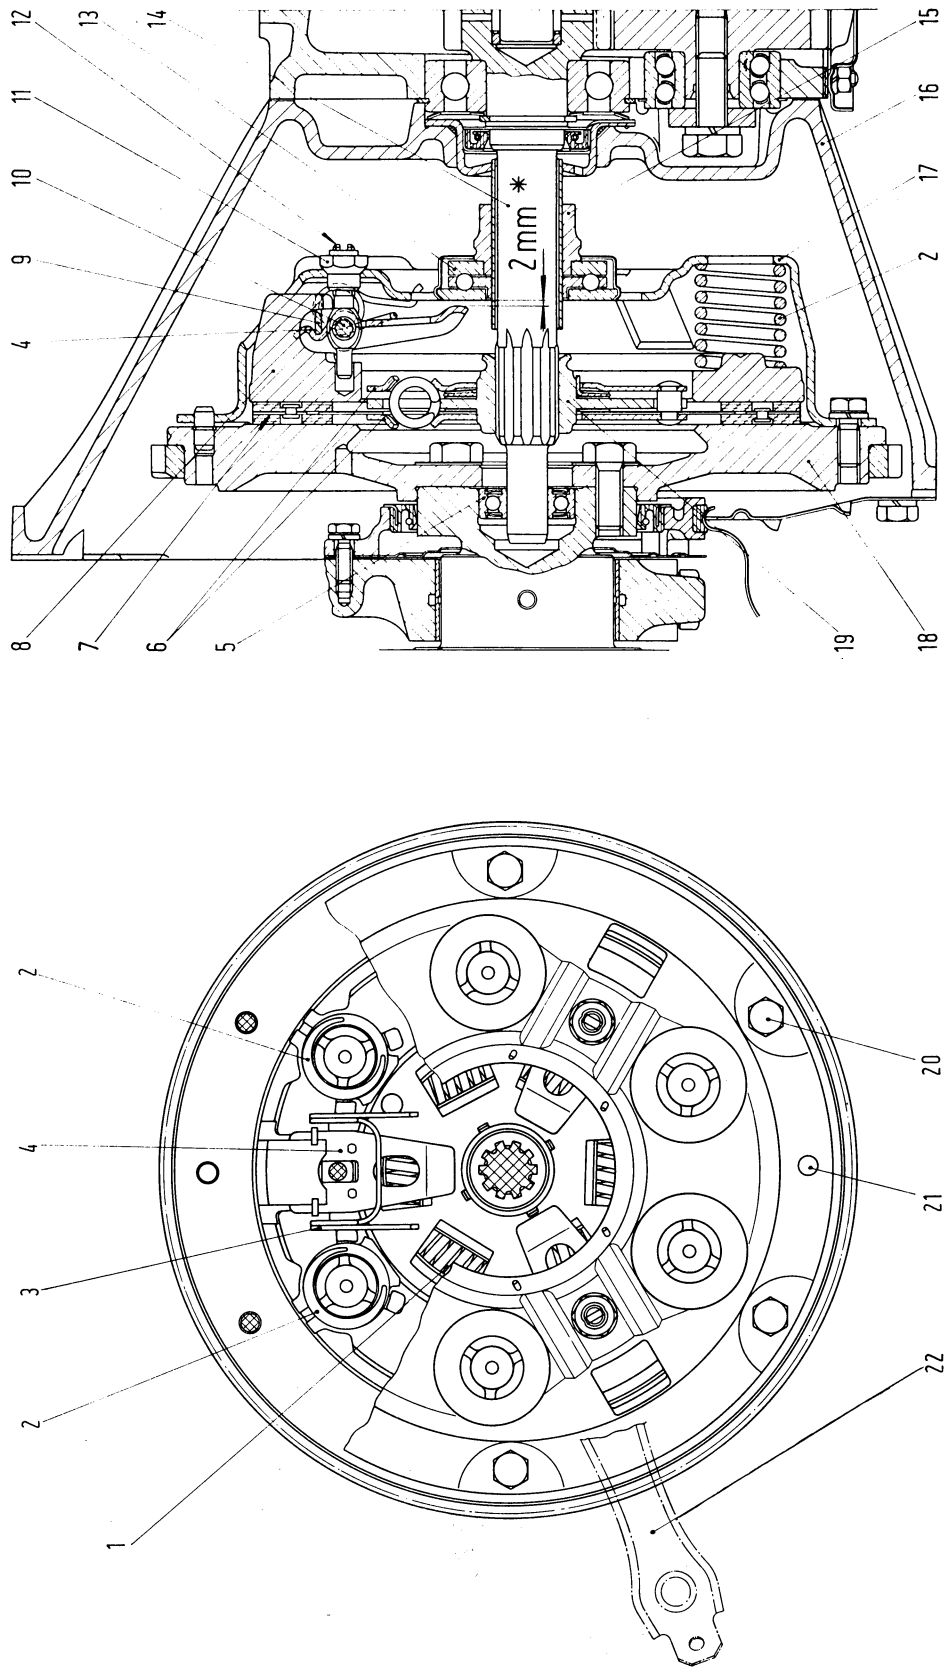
Clutch assembly: part sectional view across clutch cover and side section view.
